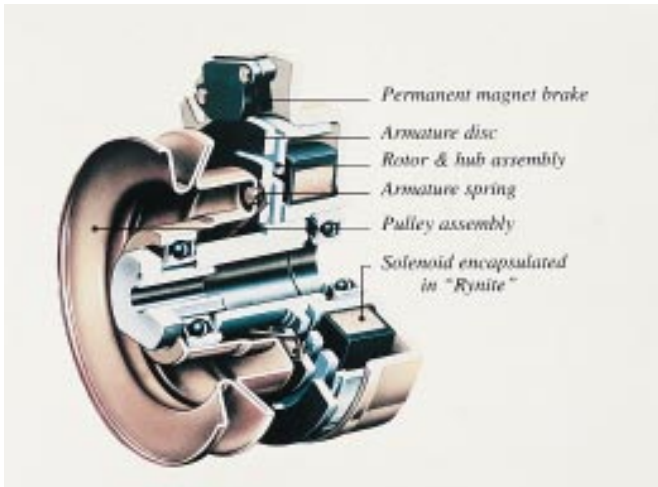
Warner Electric’s “Mag Stop” clutch and brake solenoid for riding lawn mowers encapsulated with RYNITE® PET. The clutch solenoid is wound without coil bobbins, with the wire insulation being heat bonded to retain shape during encapsulation by Alcoils.
